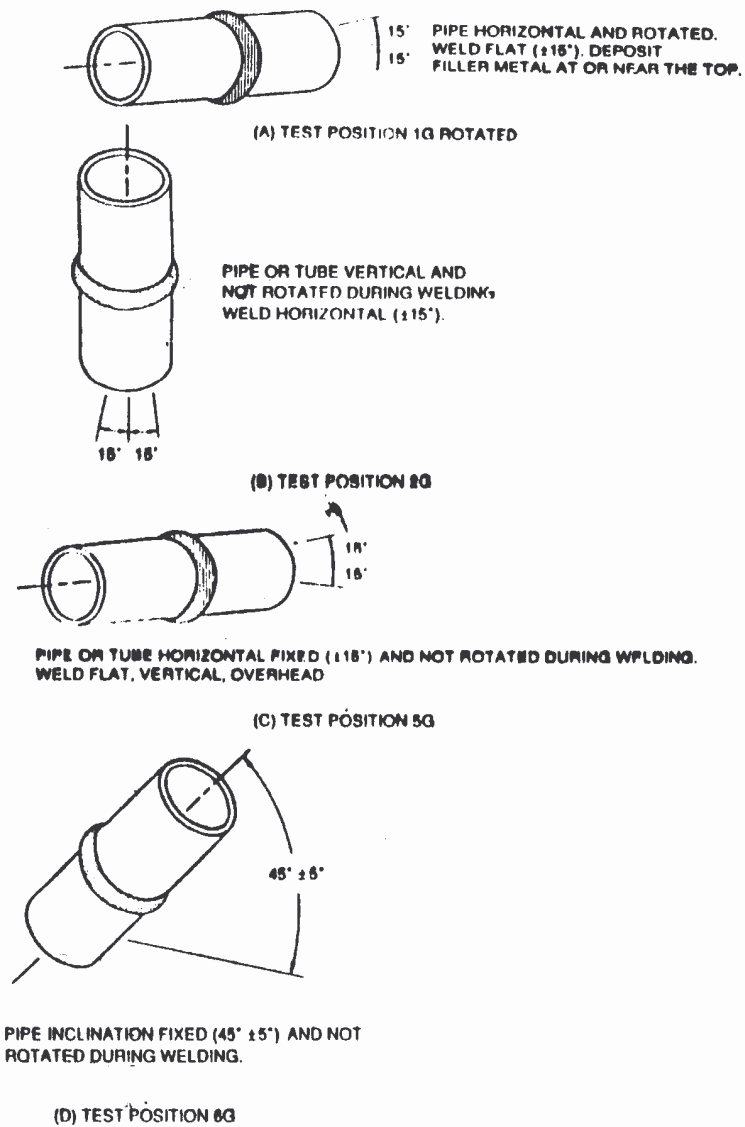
Positions of Test Pipe or Tubing for Groove Welds
